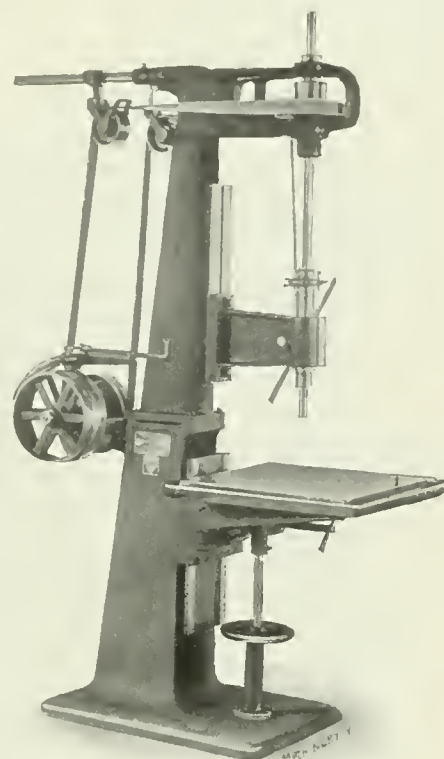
Single-spindle Drilling Machine built by the Henry & Wright Mfg. Co.
